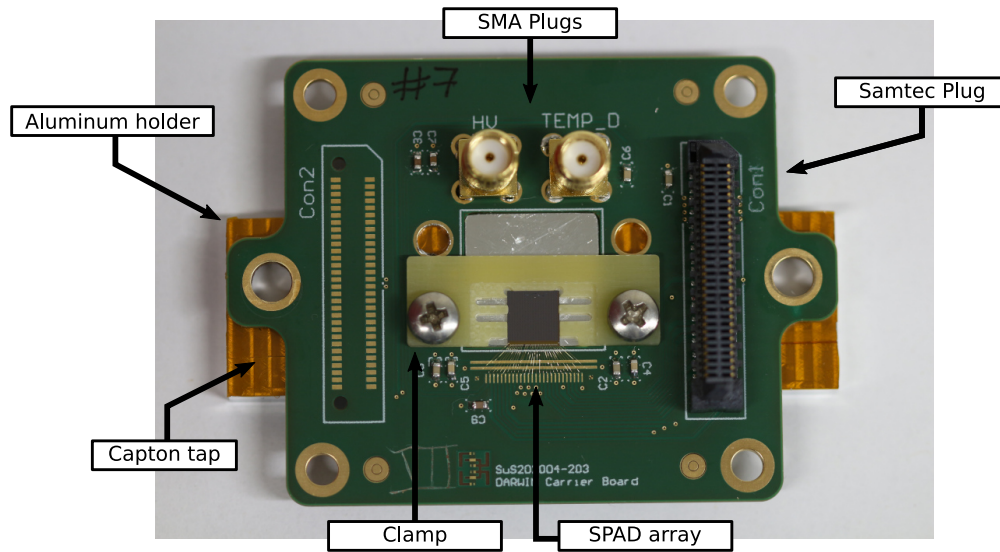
Image of the assembled chip carrier board. Below the PCB the aluminum holder, which is partly covered with Kapton tape, can be seen. In the middle there is the electrically connected DARWIN test array with the clamp, attaching it to the aluminum holder.
